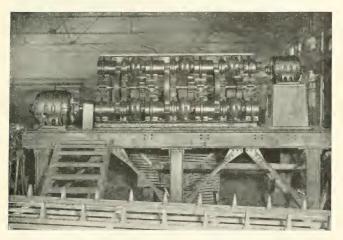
HP, 850 R.P.M. MOTORS DRIVING WELDING FURNACE PUSHER
